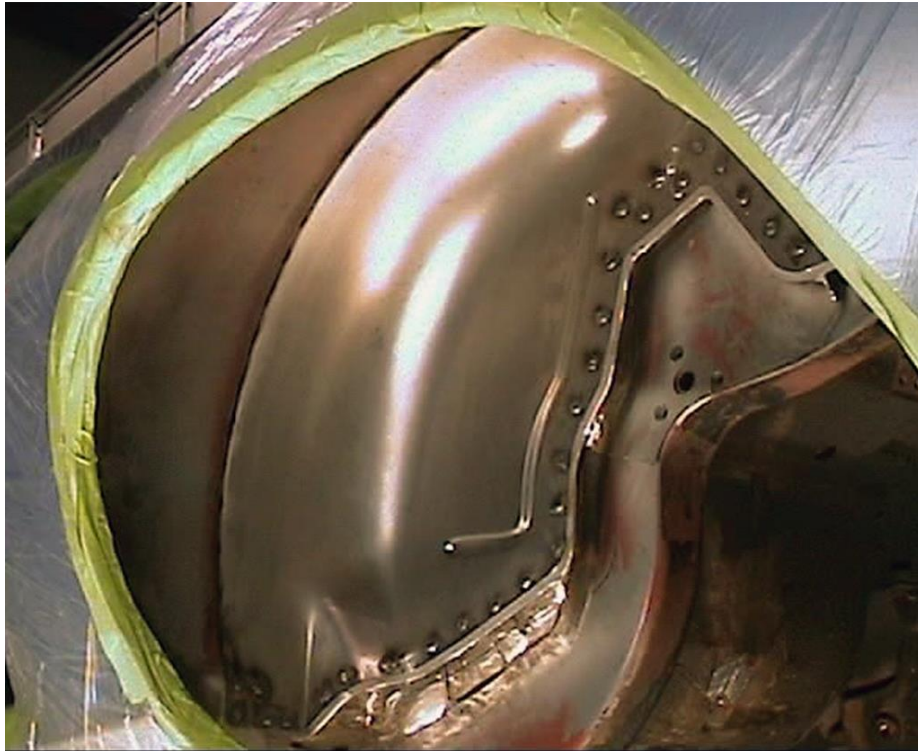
Weld Mini-Tub to Side Flanges
